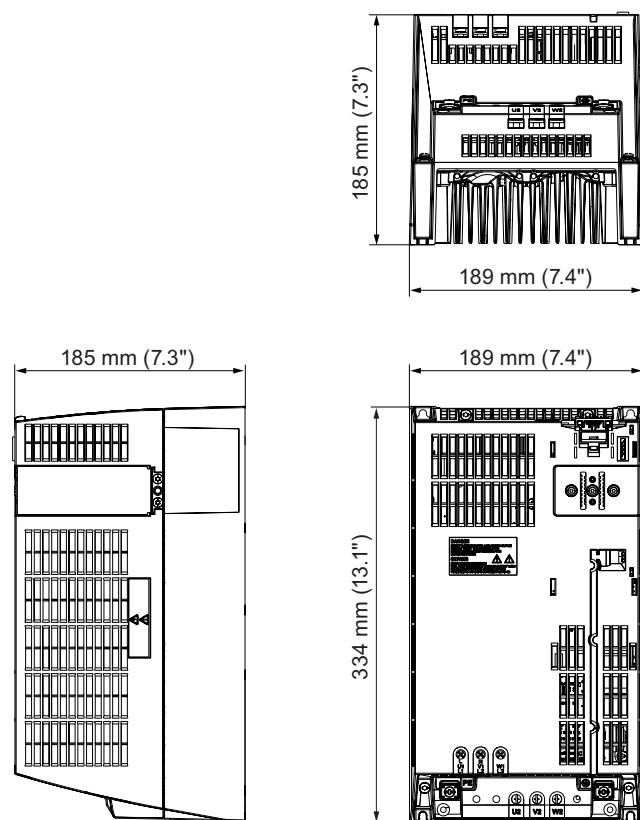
Dimensional drawing PM250 FSC, 400V
